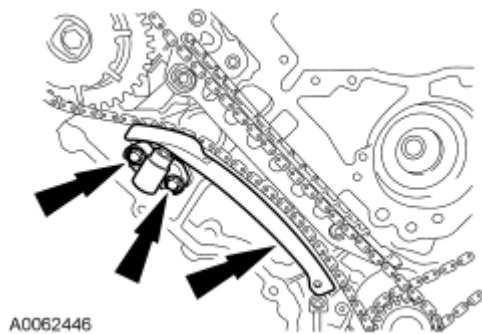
Identifying RH Timing Chain Tensioner, Tensioner Arm And Bolts
